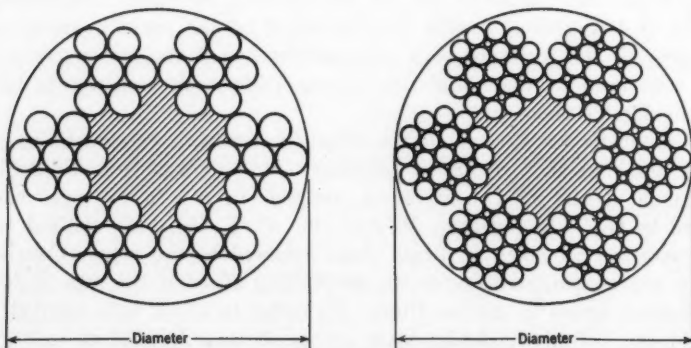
6 × 7 AND 6 × 19 WIRE-ROPE CONSTRUCTION.
